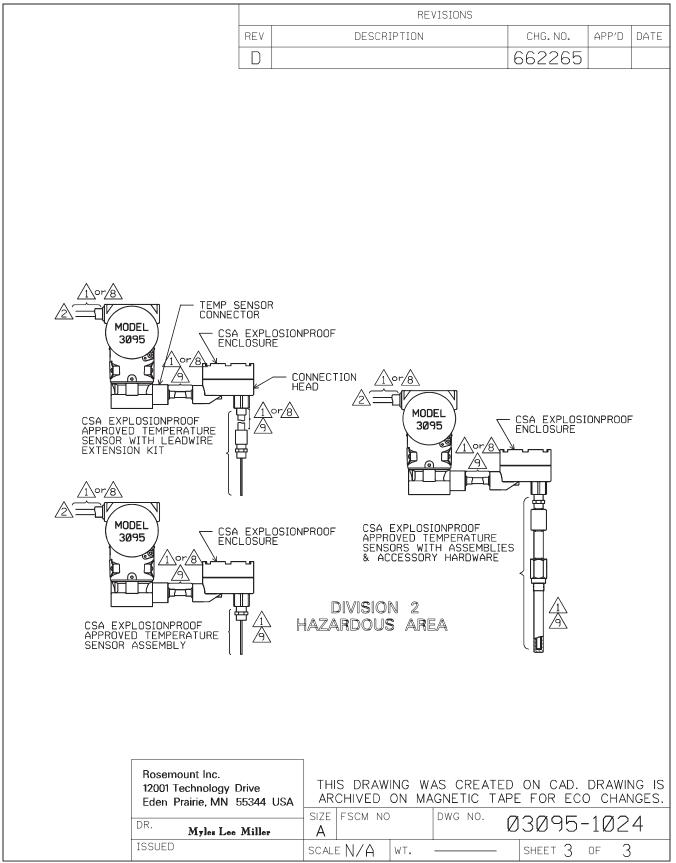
Model 3095 Multivariable Level Controller Explosion-Proof Installation Drawing.
